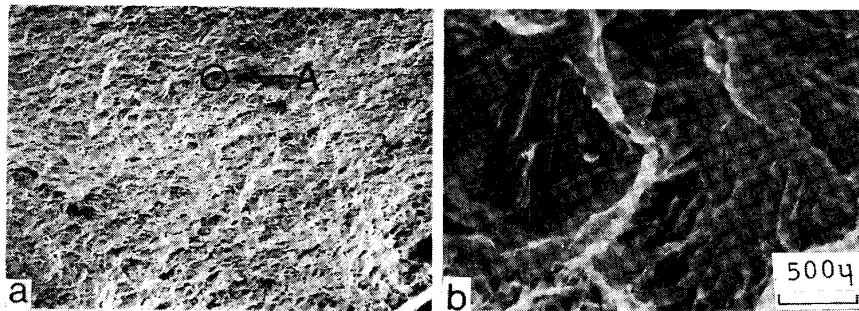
Fracture surface of slant fractured smooth specimen tested at  $-1050 \text{ mV (SCE)}$  and  $7 \times 10^{-7} \text{ s}^{-1}$ .
